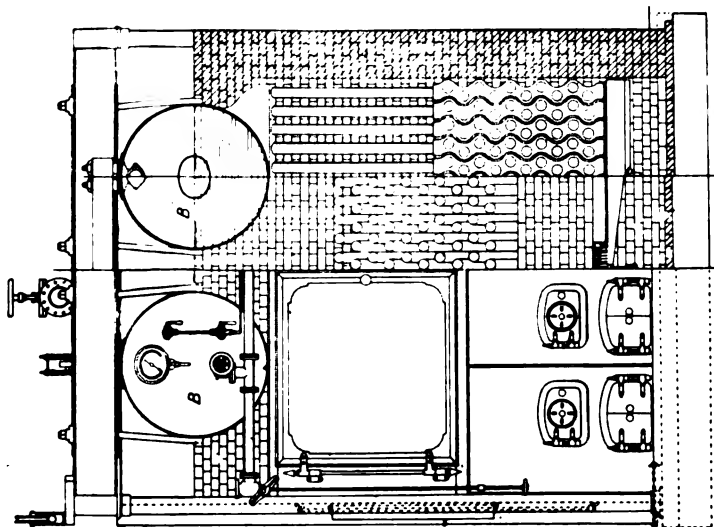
Babcock & Wilcox Boiler, Land Type.
